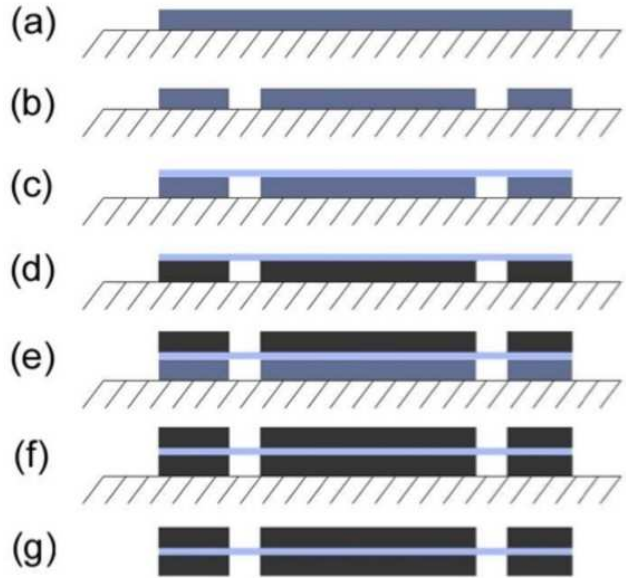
Process for making links and flexure joints using laser micromachining. a) Carbon fiber layer 1. b) Flexure cuts. c) Stack polyester flexure layer. d) Cure carbon fiber to flexure layer. e) Stack cured carbon fiber layer on uncured layer 2. f) Cure both layers. g) Remove parts from substrate.
